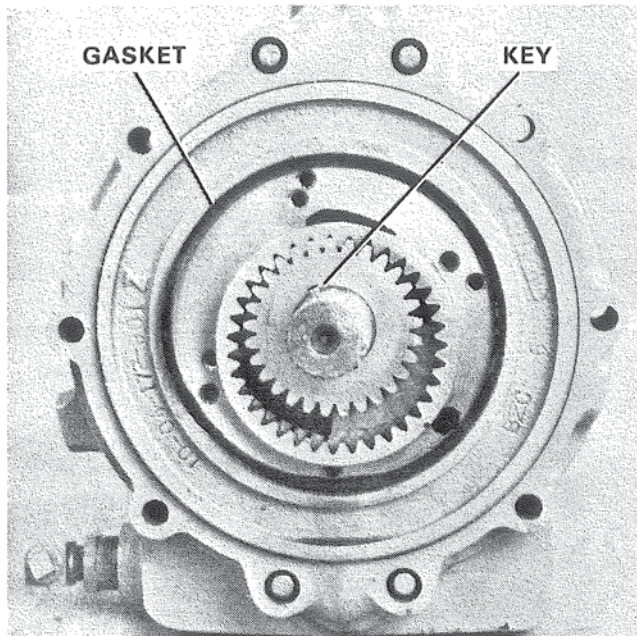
Removing Pump Drive Gear Key and Front Pump Gasket.
